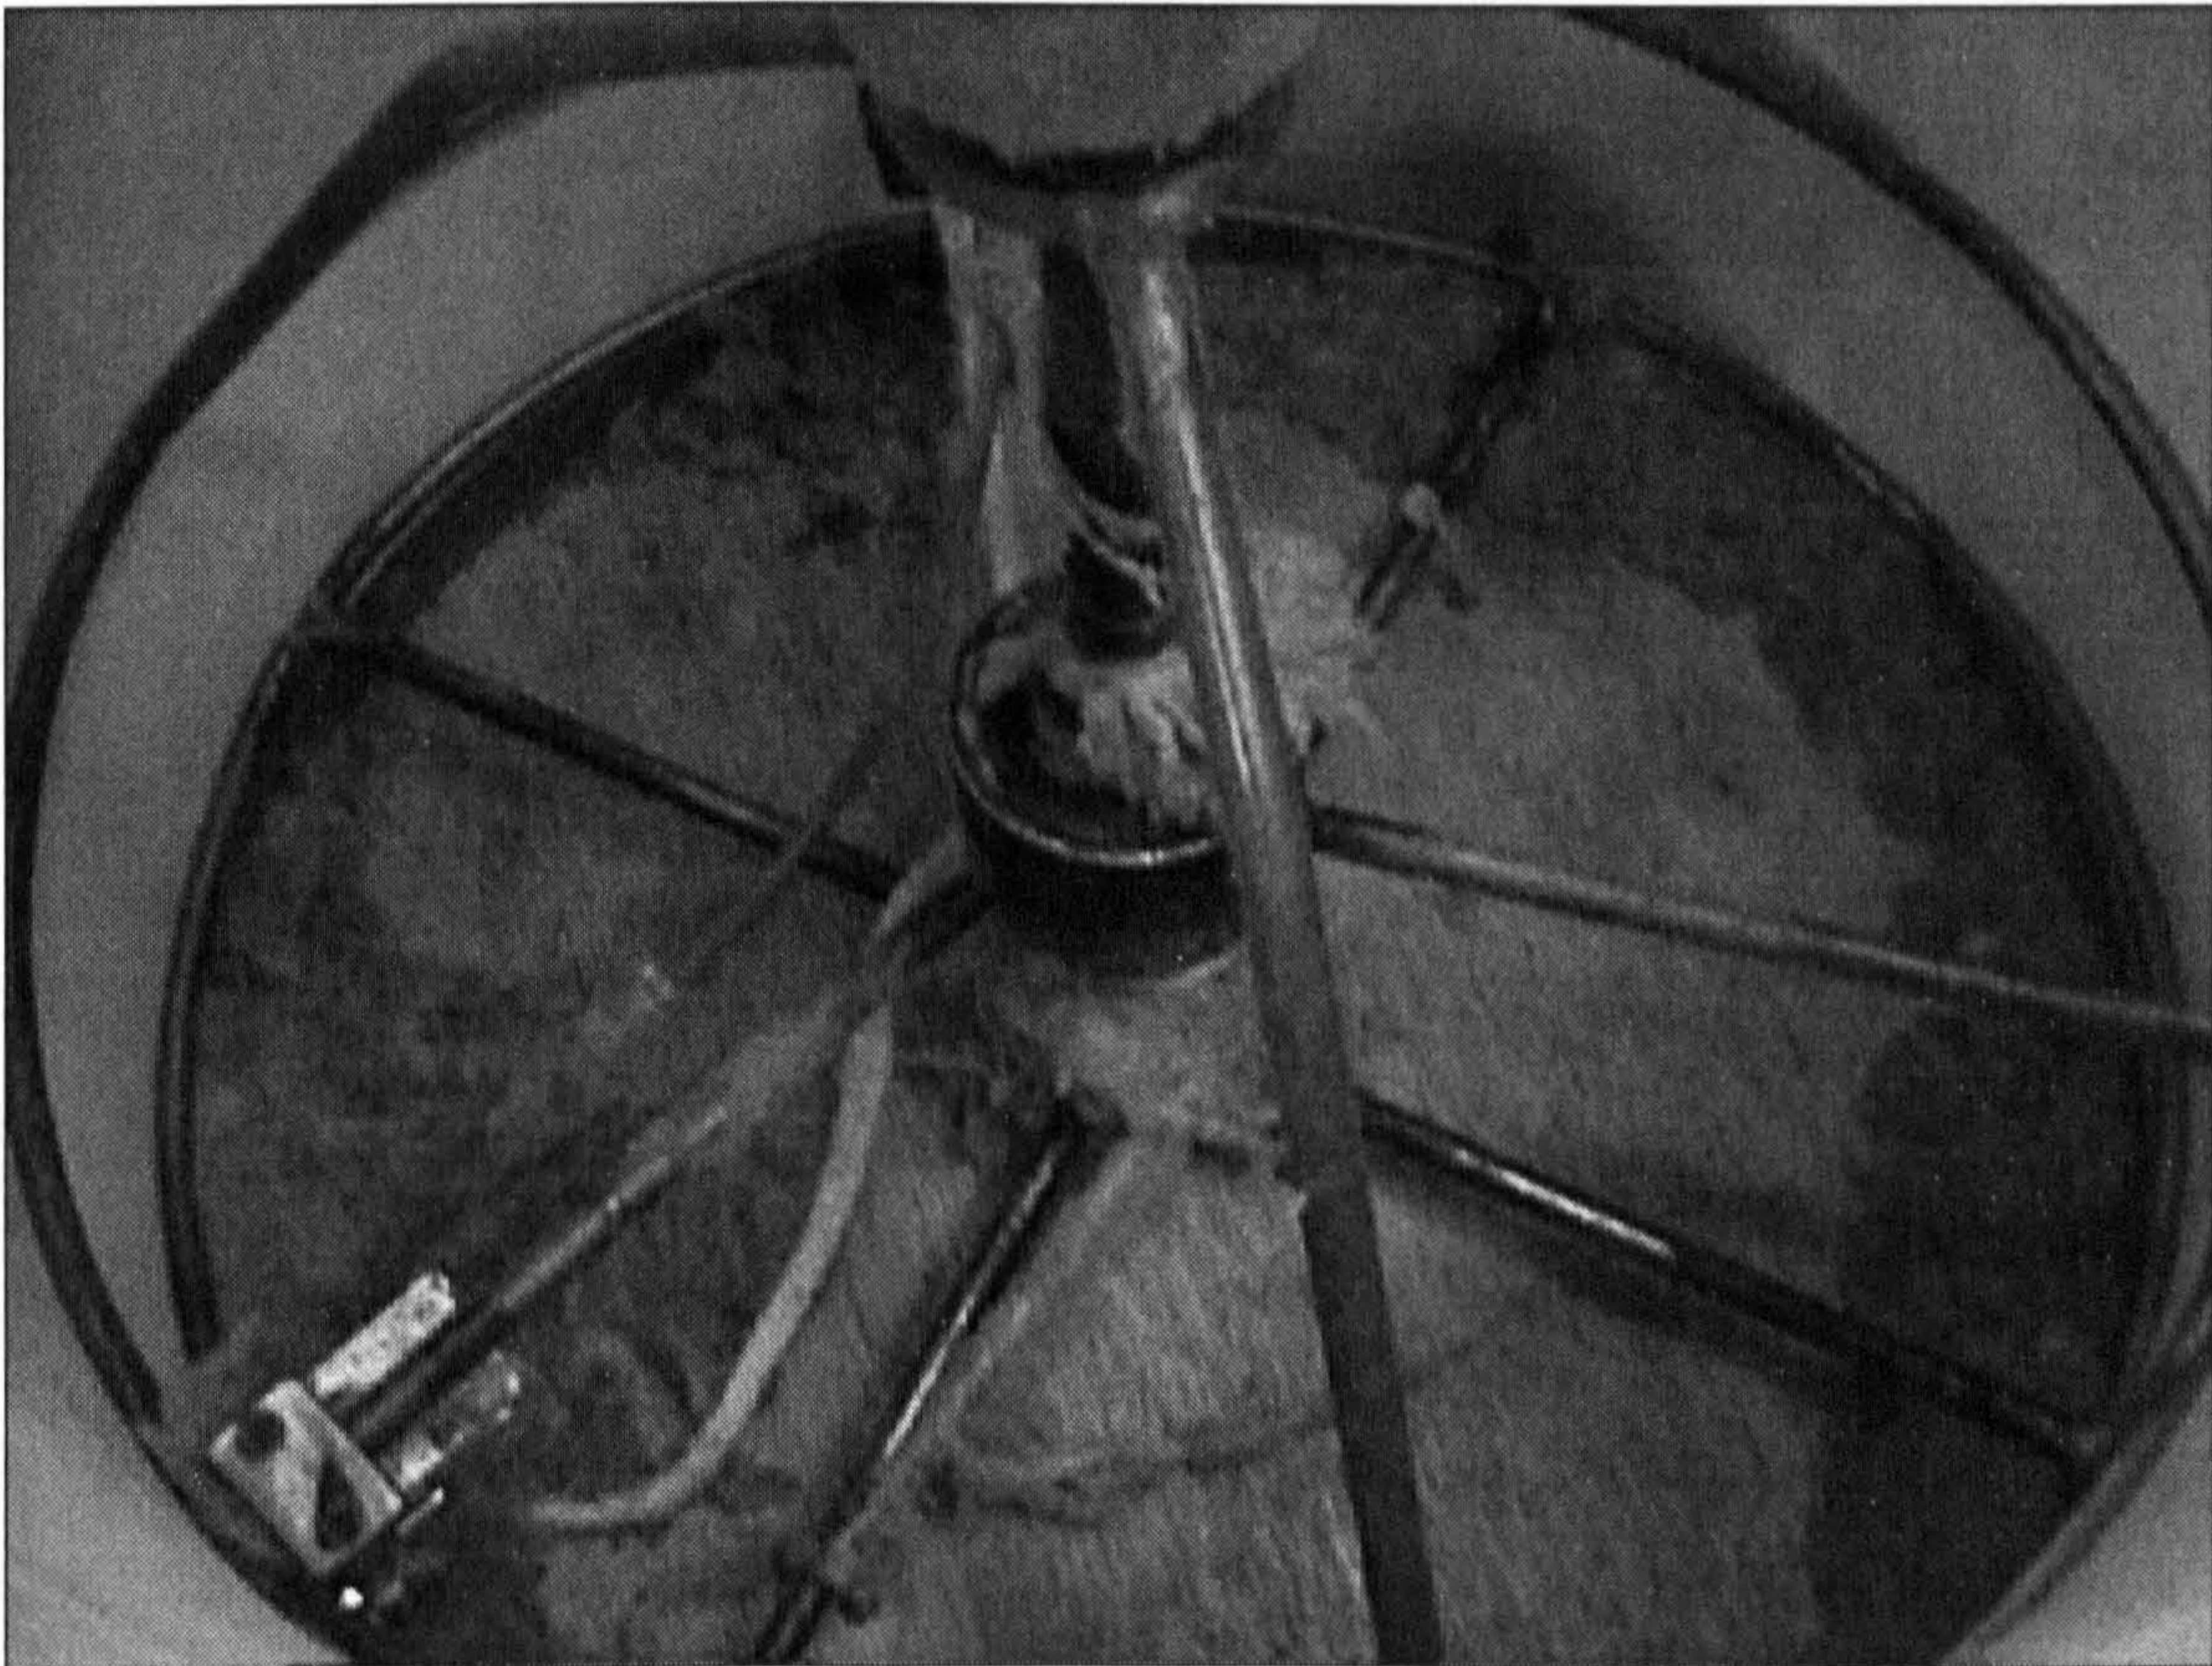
A Lint Catcher device, showing the build up of contaminants that would have otherwise fallen into the fabric tube causing defect cloth.
